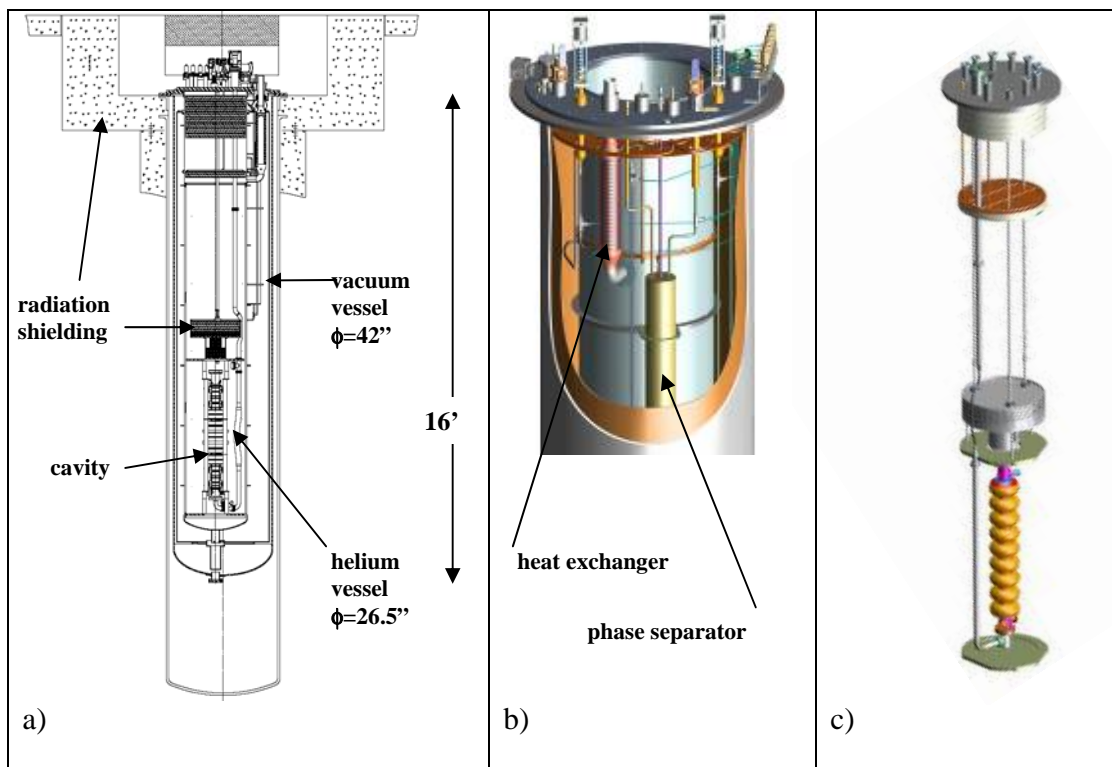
(a) Cryostat design showing vacuum vessel, helium vessel, and a single cavity insert. A portion of the radiation shielding is also shown. (b) Cutaway drawing showing the heat exchanger and phase separator, and (c) Top plate assembly with cavity and radiation shielding insert attached.
